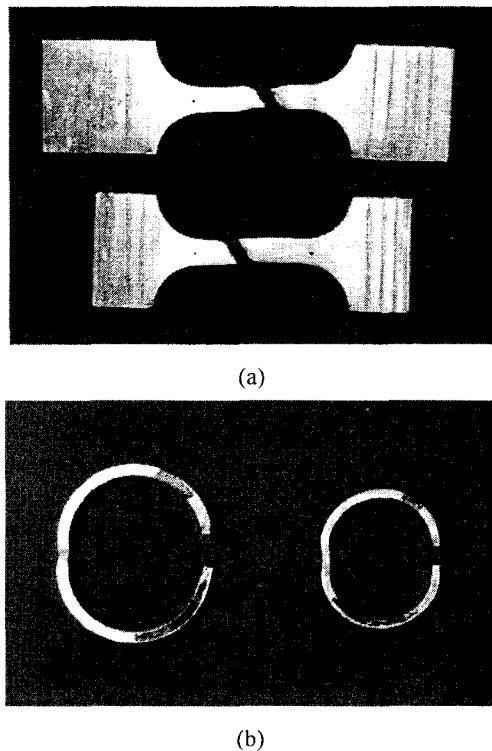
Fractured transverse specimens: (a) flattened (b) original (ring)
